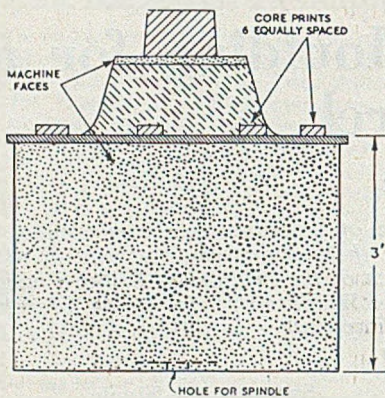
Barrel Part of the Pattern Equipment for Forming the End Portion.
